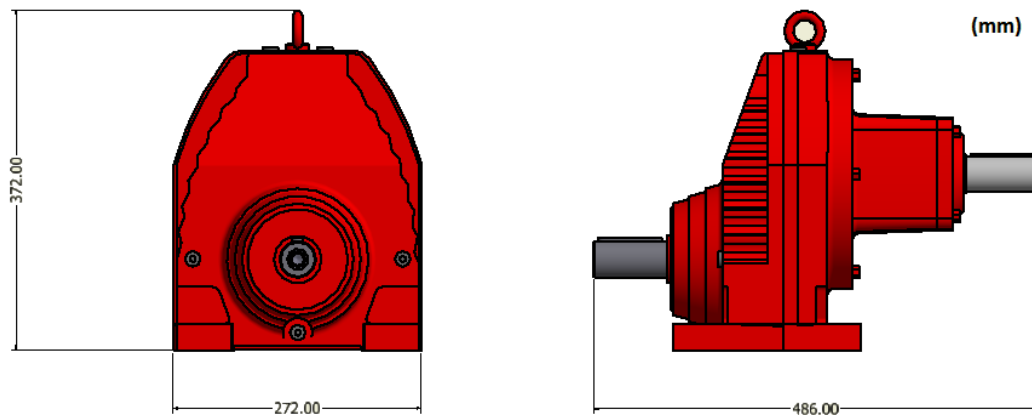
CAD drawing of the mechanical helical gear [68]
